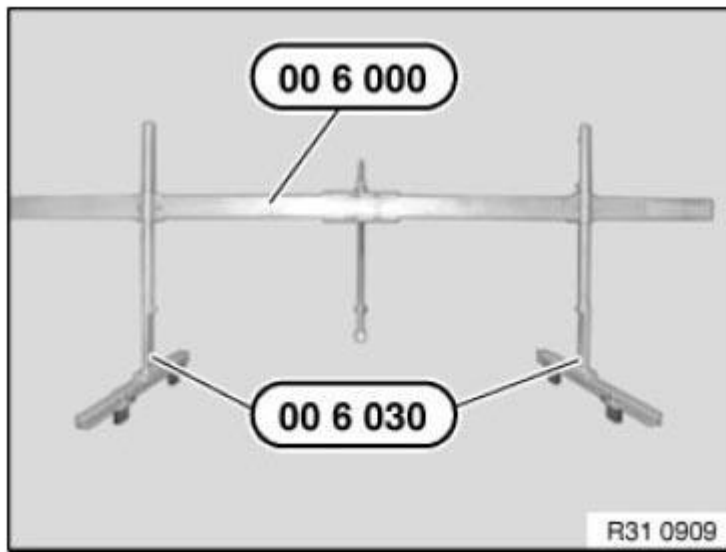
Identifying Transverse Member On Special Tool 00 6 030
